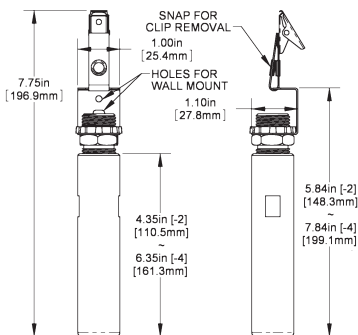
2" & 4" Hanging Bracket Thermobuffer (Transmitter is ordered and mounted separately.)
